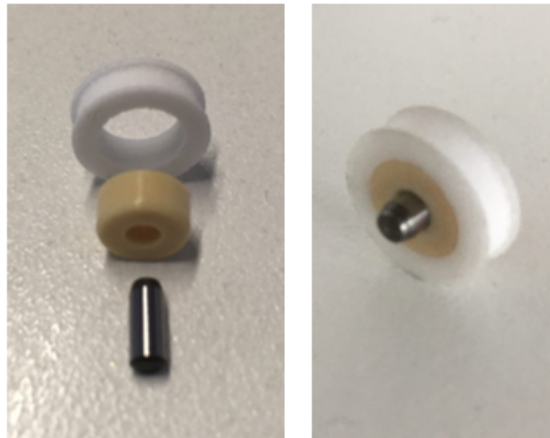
Press the ball bearing into the pulley. Insert the axle pin in the ball bearing
